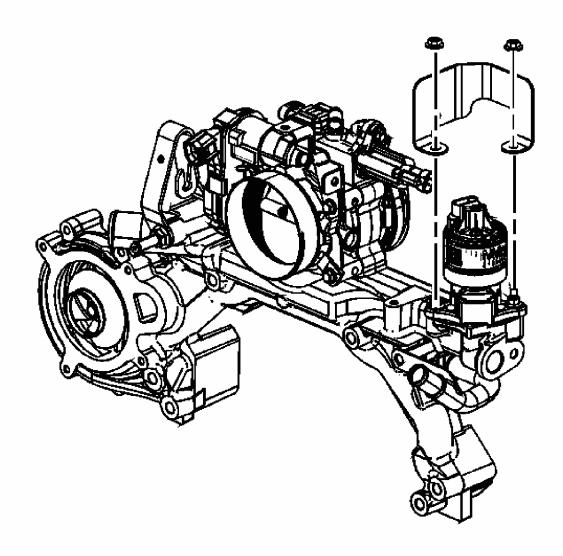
Identifying EGR Bracket Shield Nuts Courtesy of GENERAL MOTORS CORP.
